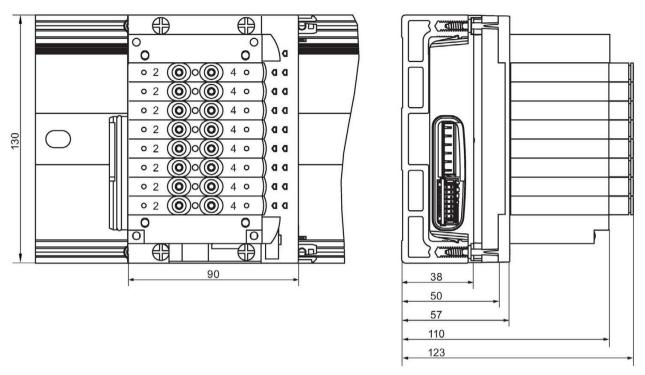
Dimension drawing of 16 DO DC 24V CPV10 pneumatic interface module with FESTO valve terminal CPV10 on compact type rack
